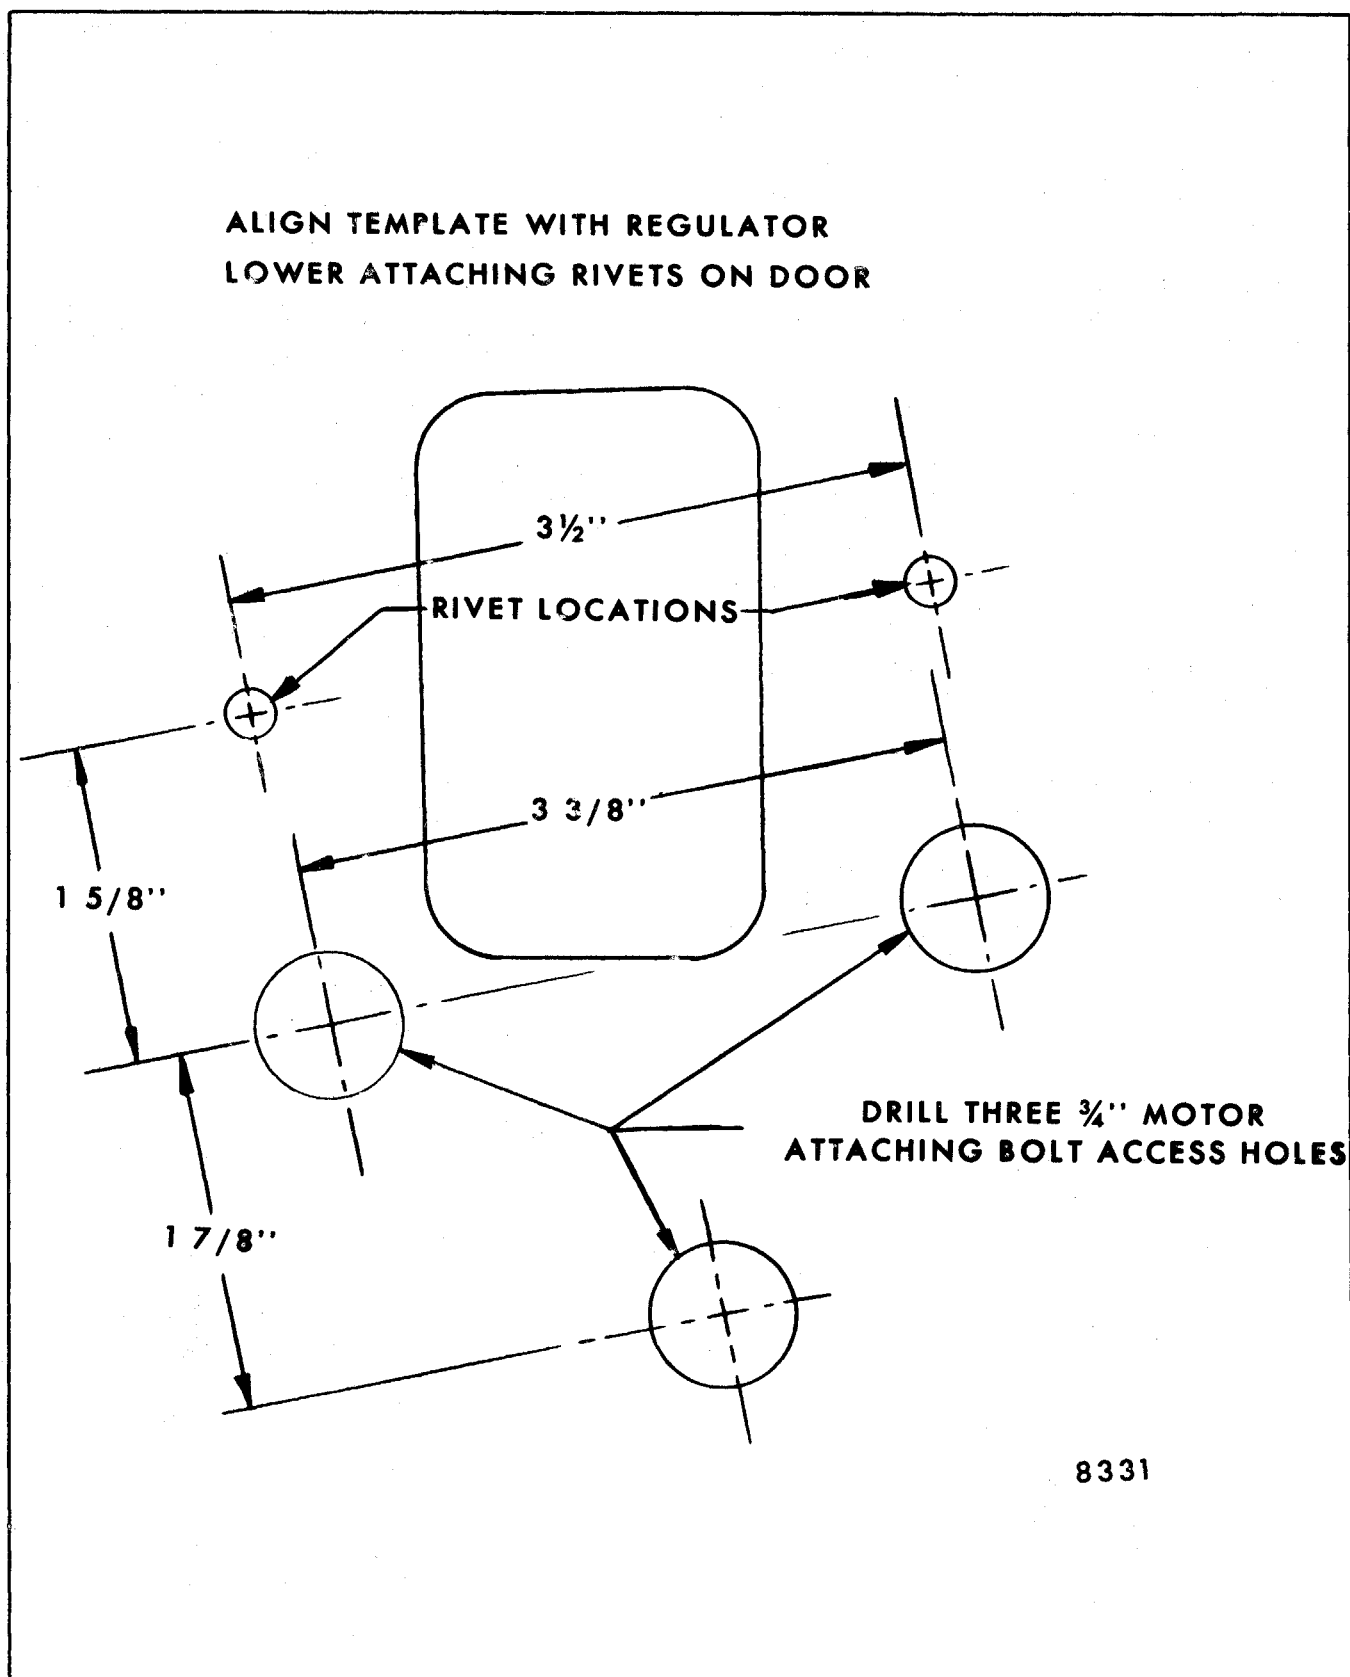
Window Regulator Reference Points for Locating Window Motor to Regulator Attaching Bolts - "X" Styles, Rear Door
